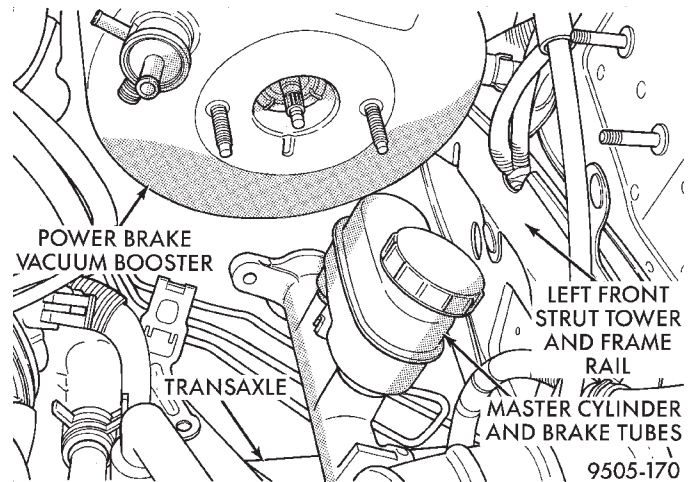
Master Cylinder Assembly Positioned For Booster Removal
